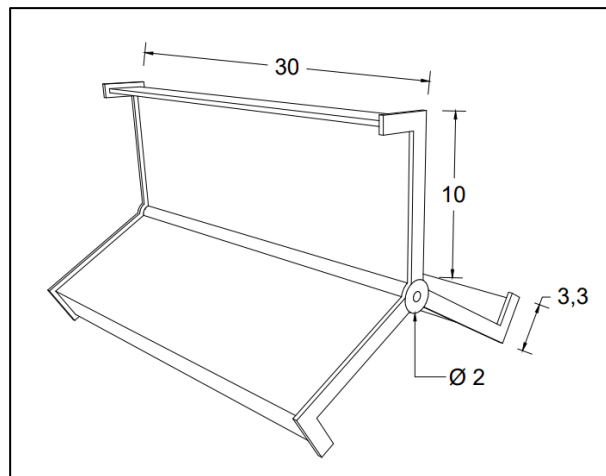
Design of Savonius Horizontal Axis Turbine Blades
